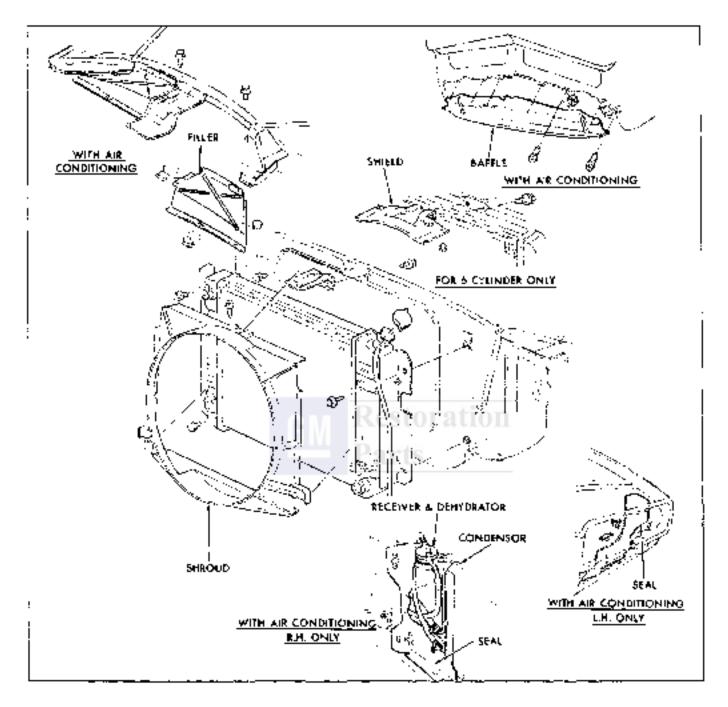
Radiator Support and Ballie Assembly - Firebook
